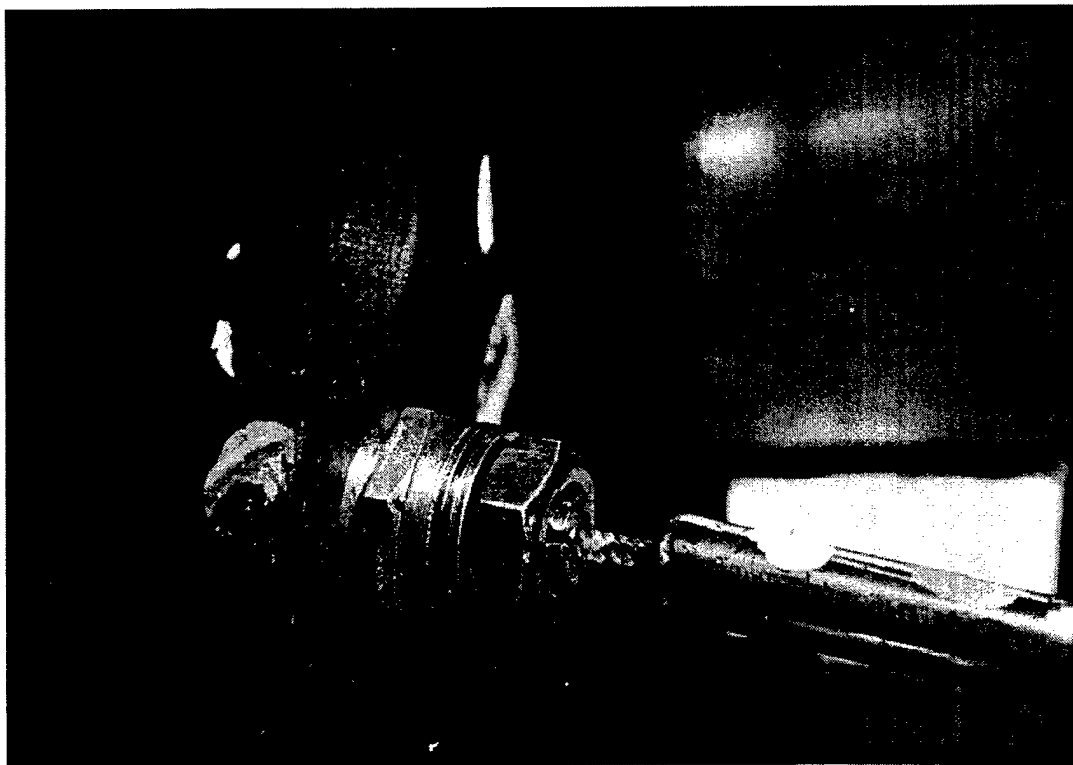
COPPER PLUG ASSEMBLY AT "B" LOCATION
